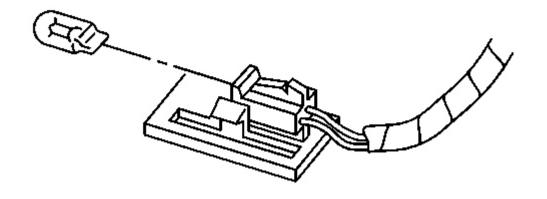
Bulb At Socket Courtesy of GENERAL MOTORS CORP.
